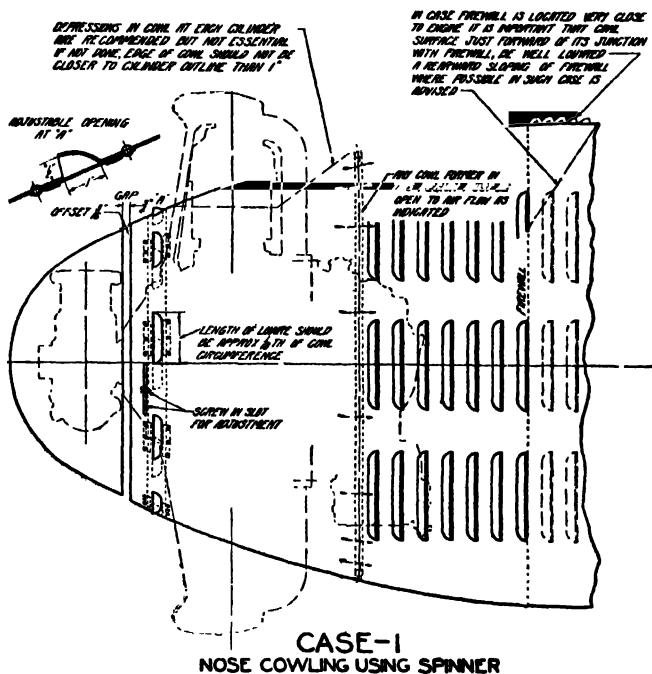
Nose Cowling When Propeller Spinner is Employed for Wright "Cyclone" Engine.
